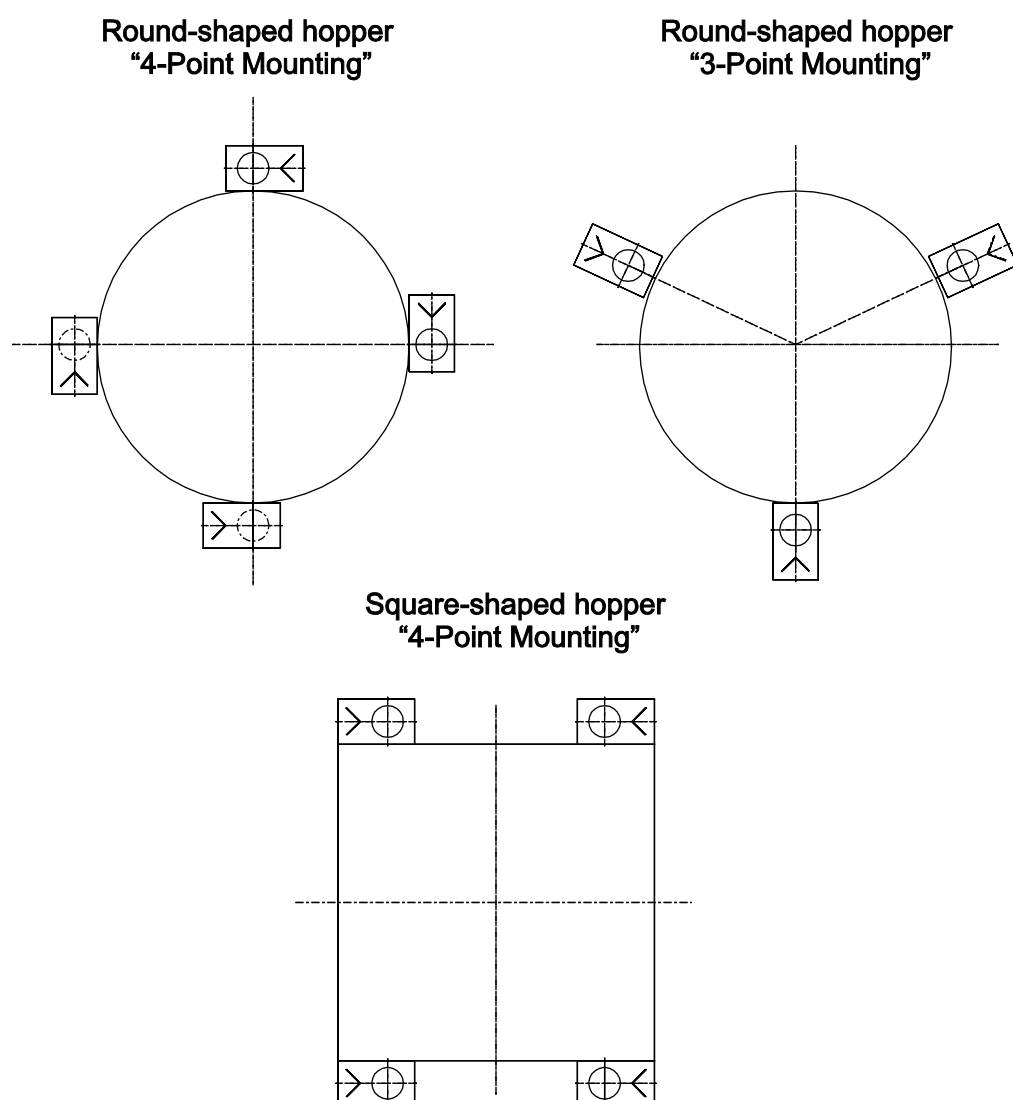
Arrangement of the supporting points for installation of the compact bearing
